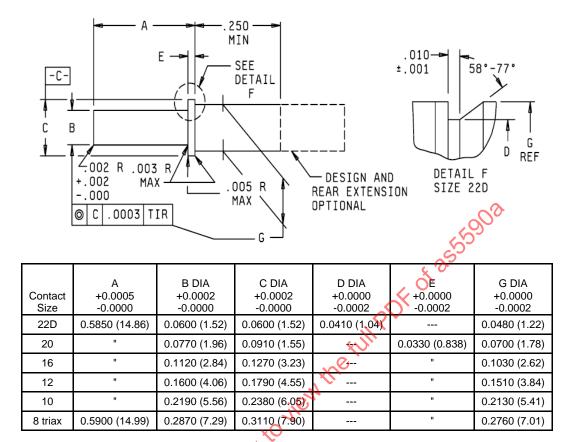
TEST GAUGE, SOCKET, GAUGE LOCATION
